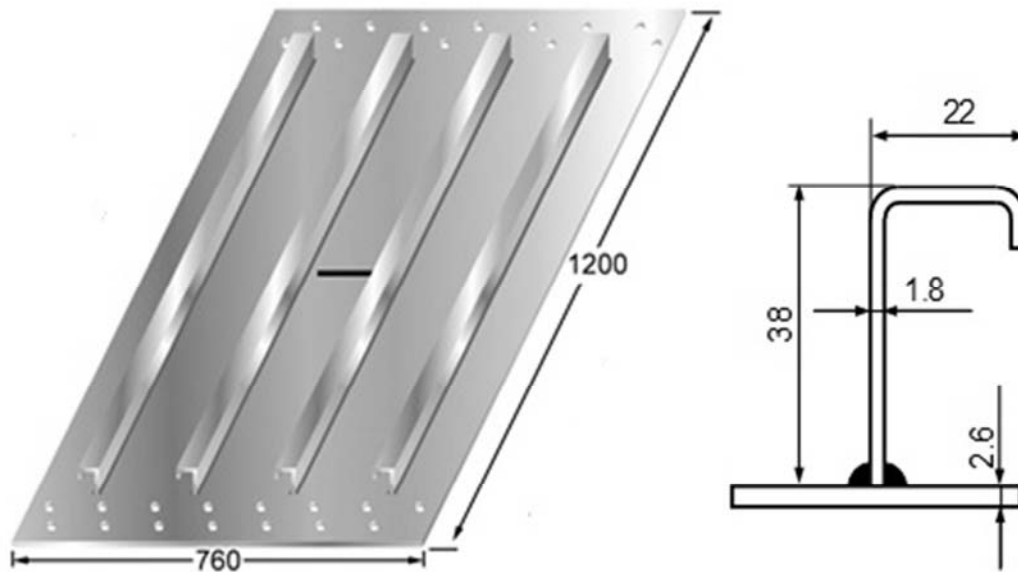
Dimensions of the 4-stringer panel made of AA6156-T6 aluminum
